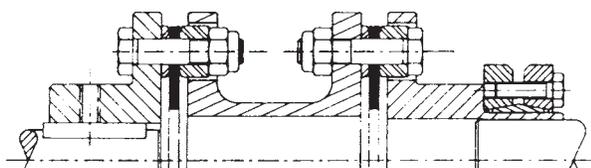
Double flexing coupling fastened with a Shrink Disc® on one side and a key with a set screw on the other.
